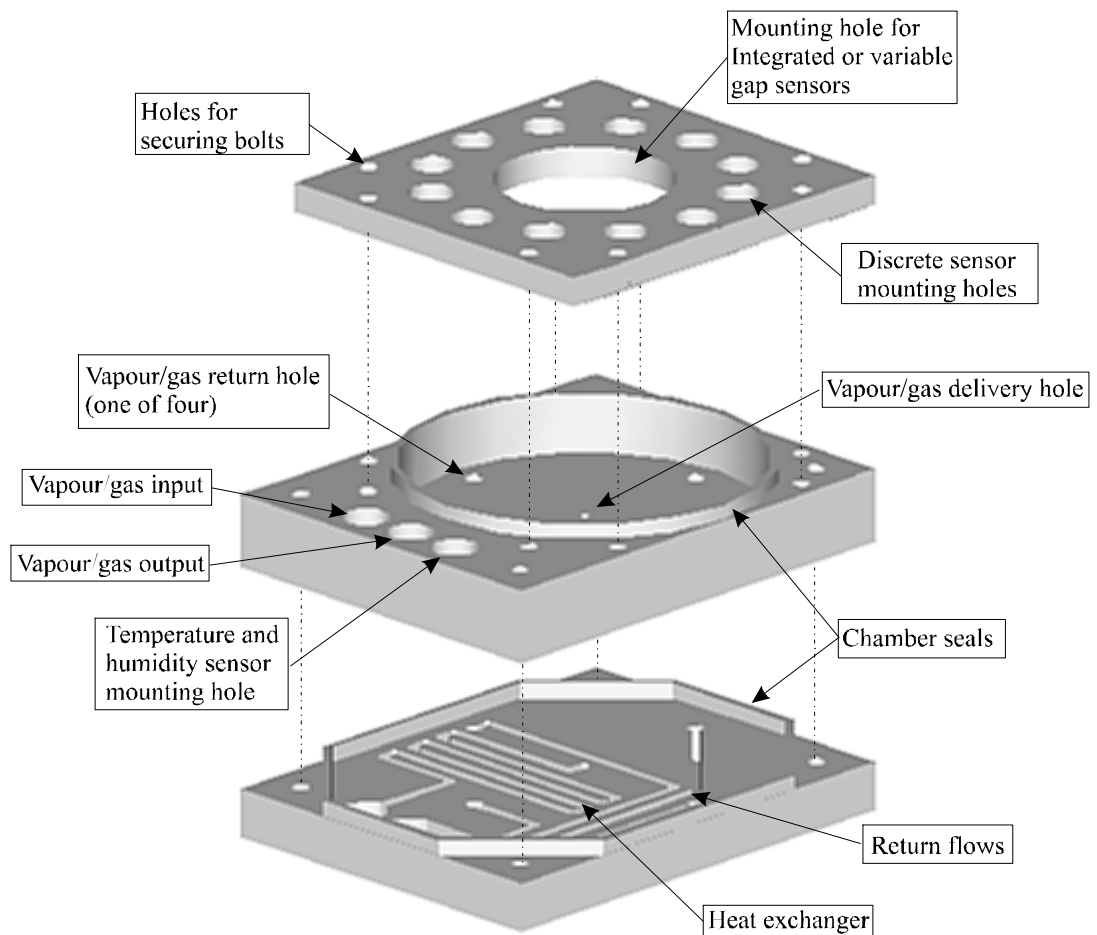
An exploded view of the second generation sensor chamber showing the location of connectors, heat exchanger, screw holes, chamber seals and vapour delivery/return holes. Indications of the way in which the blocks can be connected together is also given.
